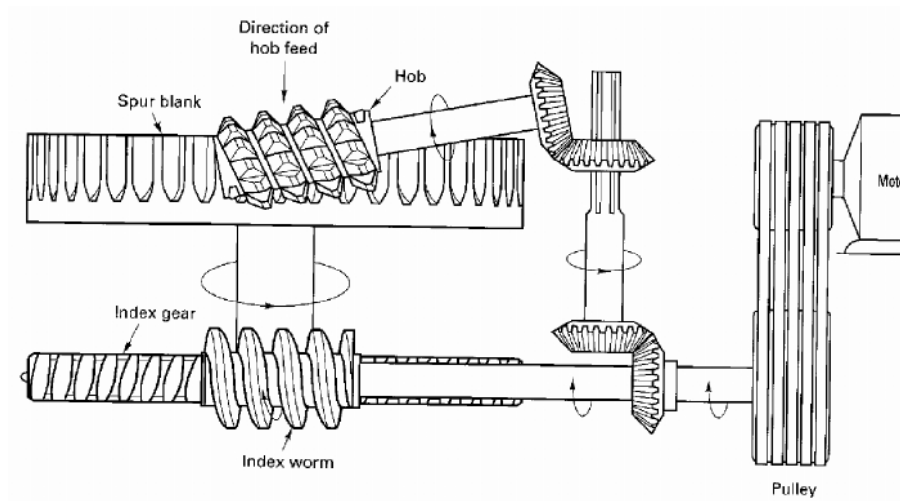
Schematic for a gear hobbing machine for hobbing a spur gear
